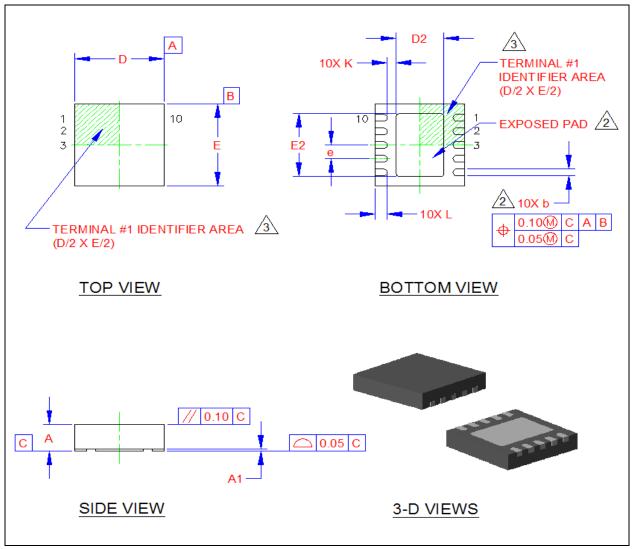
10-Pin DFN 3mm x 3mm Package Drawings
